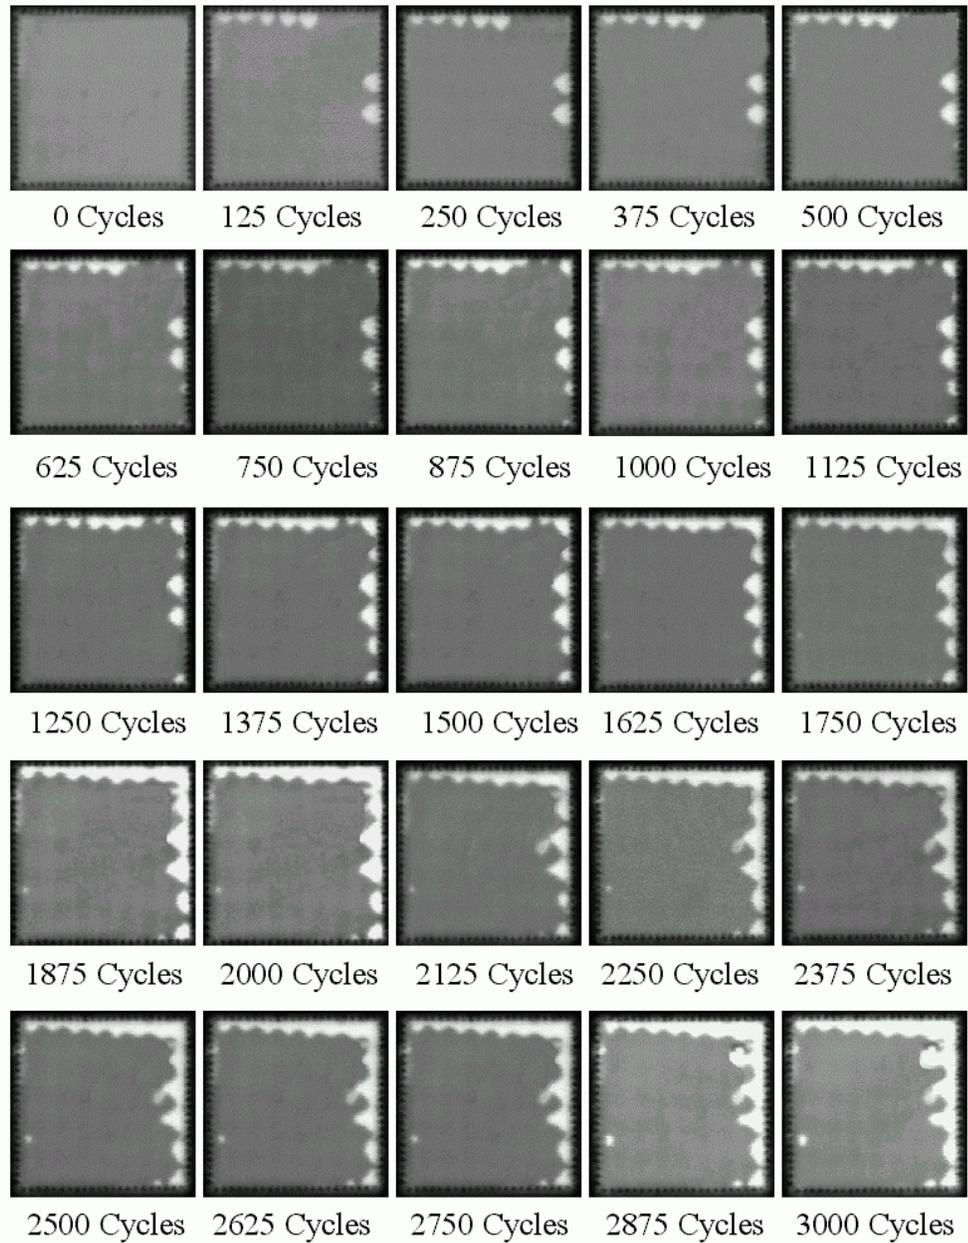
Typical Delamination History for a Single Flip Chip Assembly (Underfill UF3, Board 16)
